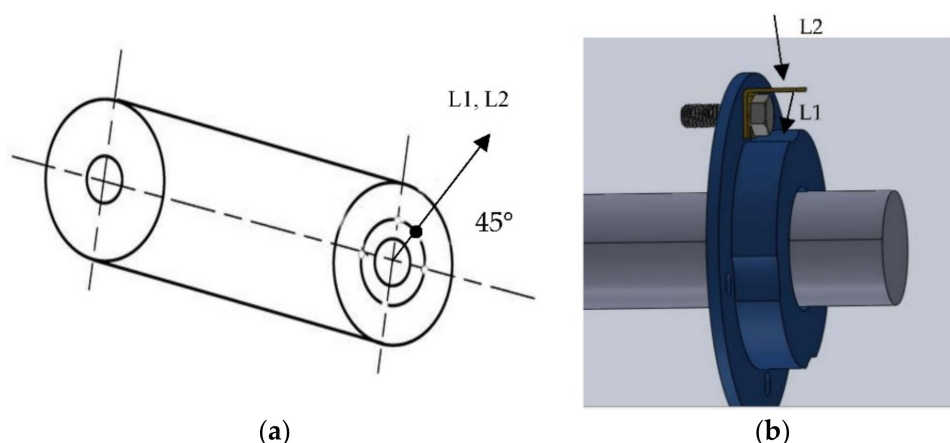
Sensor mounting position: L1 when the accelerometer is placed directly on a bearing seat; and L2 when the accelerometer is placed on a manufactured bracket: (a) The angle of the accelerometer mounted, and (b) The position of the accelerometer mounted.
